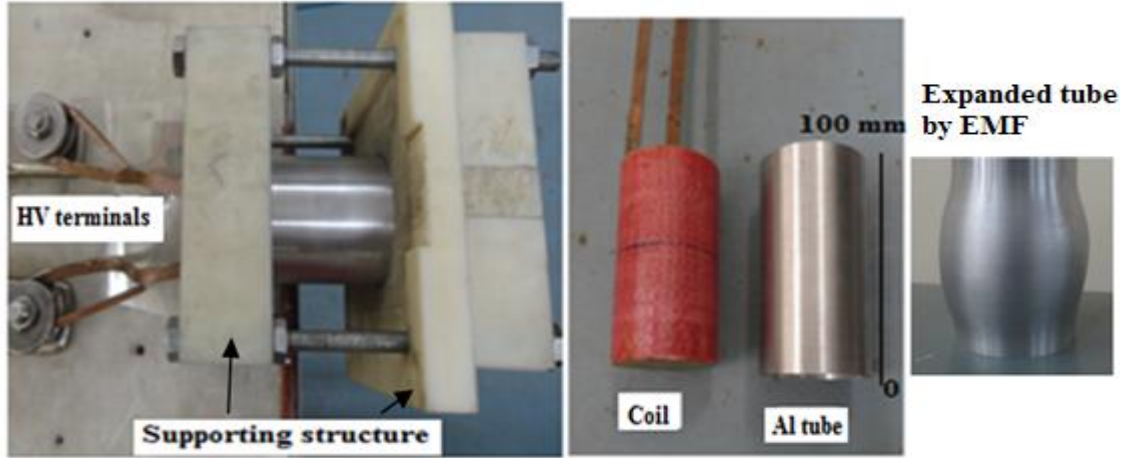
Arrangement of coil, aluminum tube with dimensions
